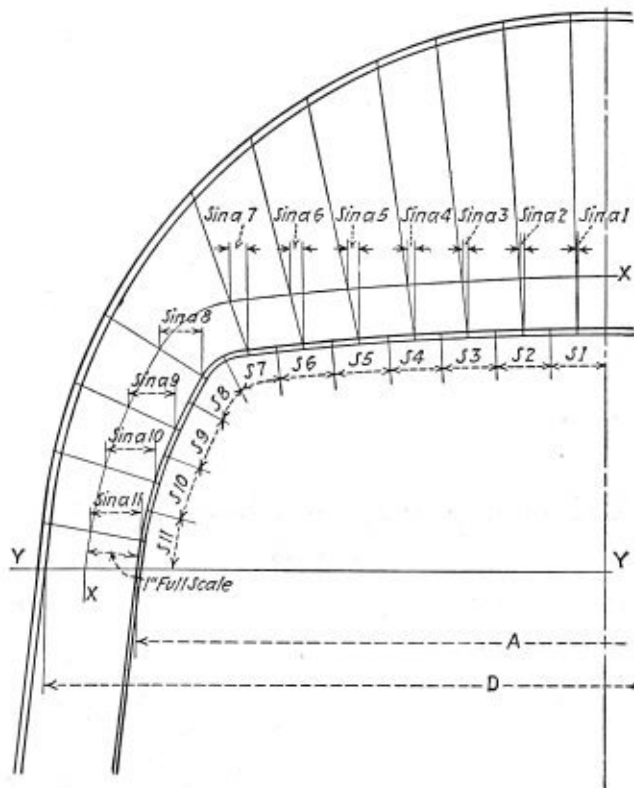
Accurate layout of crown sheet and wrapper sheet should be made
